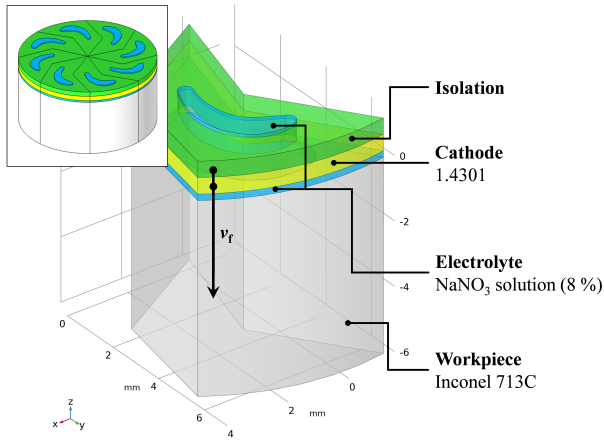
Simulation model of the PECM process for manufacturing centrifugal impellers from a cylindrical workpiece.
